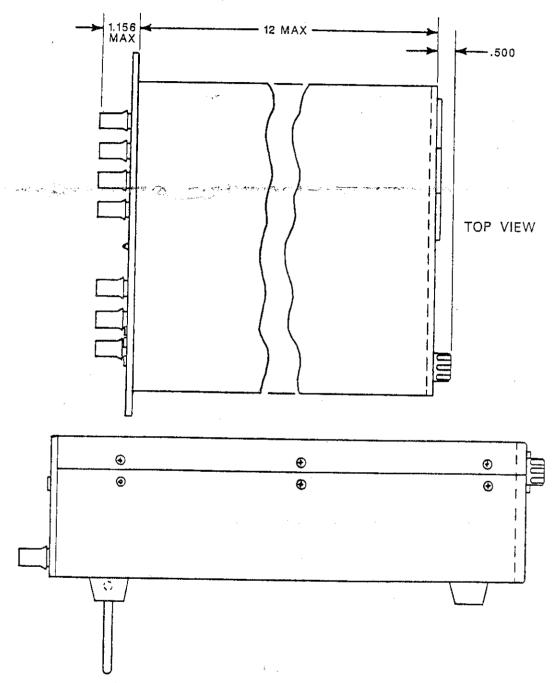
API Outline Drawing (Sheet 1 of 2)
